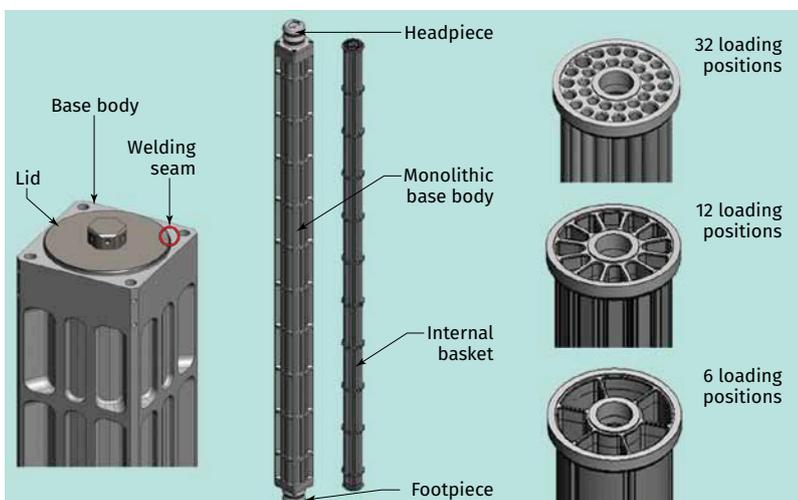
PWR-Quiver for damaged fuel rods: Sealing system (left), head- and foot piece mounted to the base body and internal basket (middle) and example configurations of internal baskets (right)
